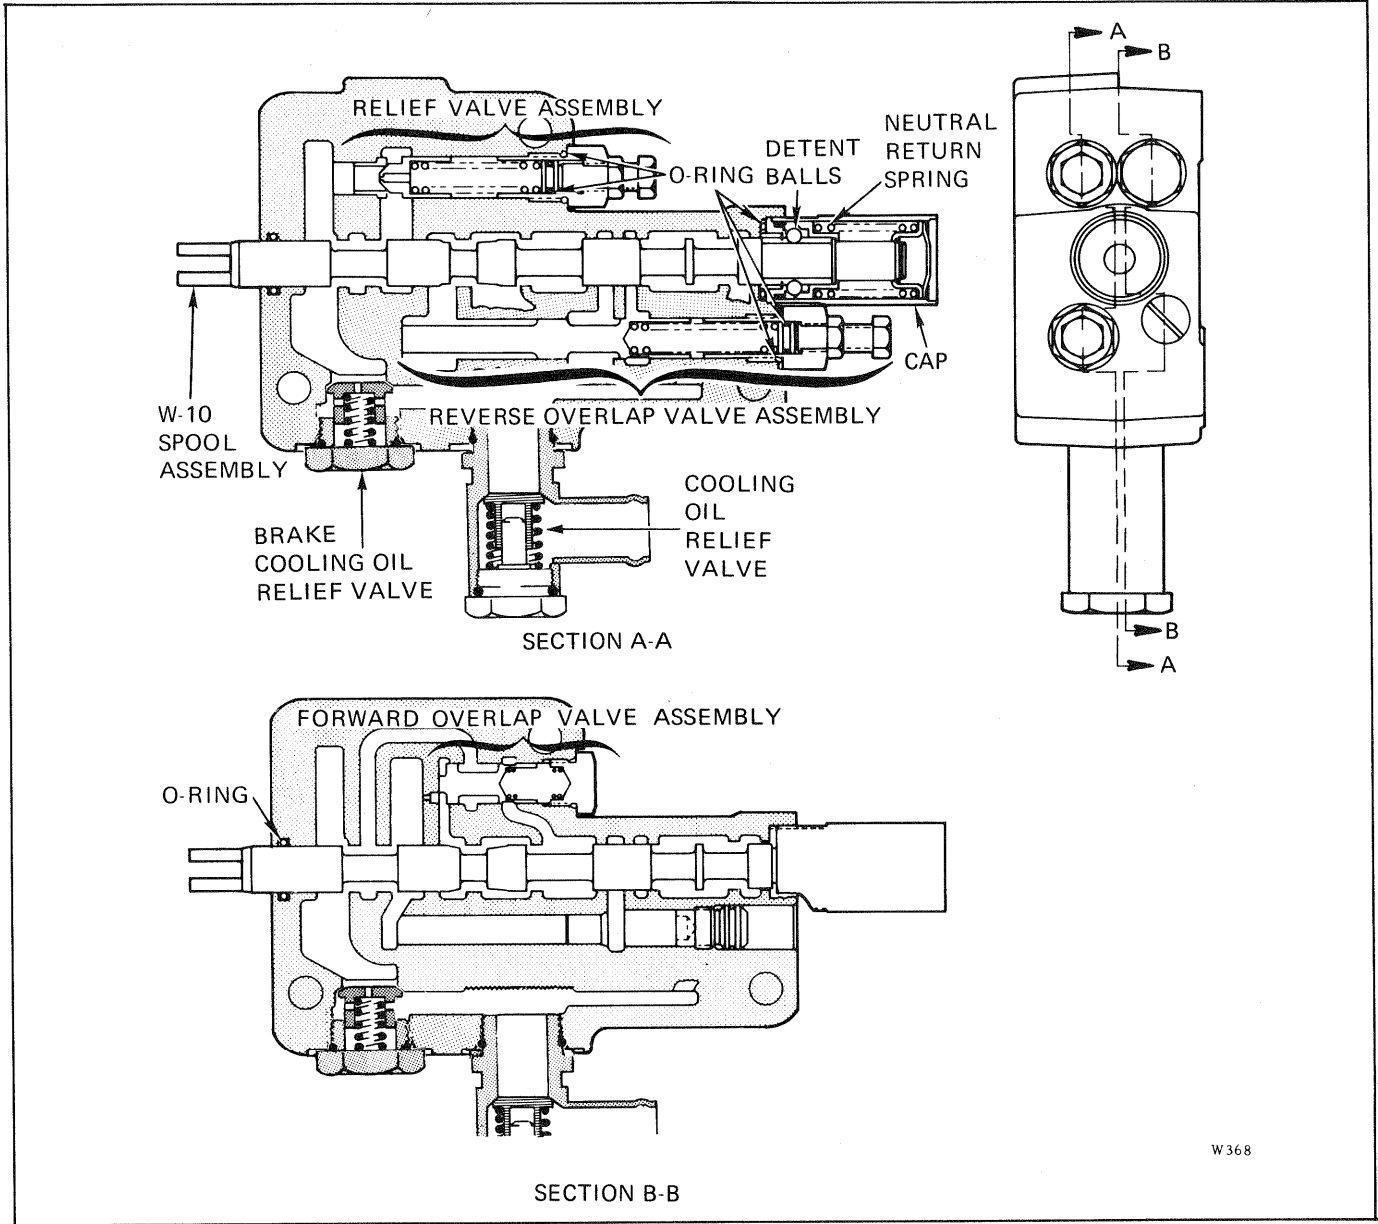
CONTROL VALVE REPAIR, POWER CONTROL WINCH (Sheet 2 of 2)
